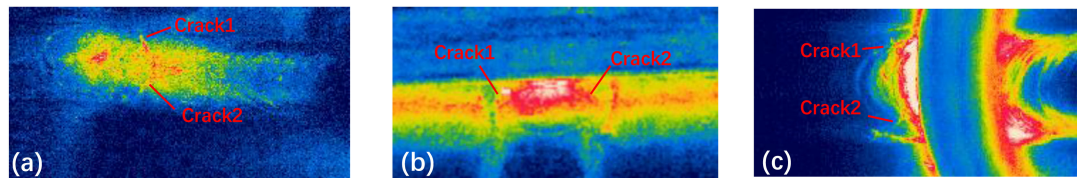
Experiment results of weld cracks using (a) proposed configuration, (b) line coil, and (c) helix coil.
